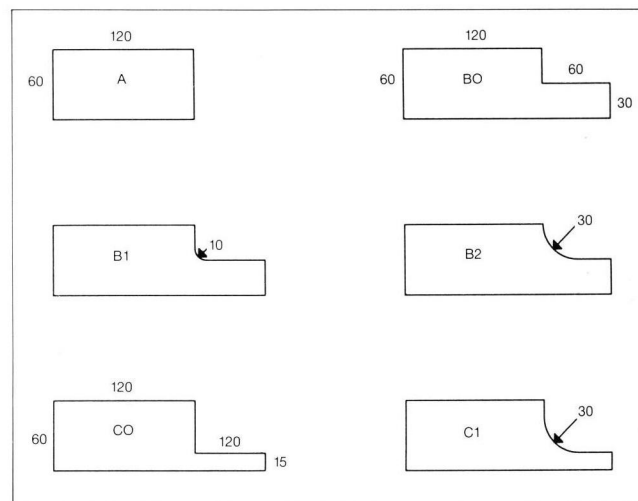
Cross section of the casting geometries studied (dimensions in mm; all castings measure 120 mm perpendicular to the cross sections shown).
